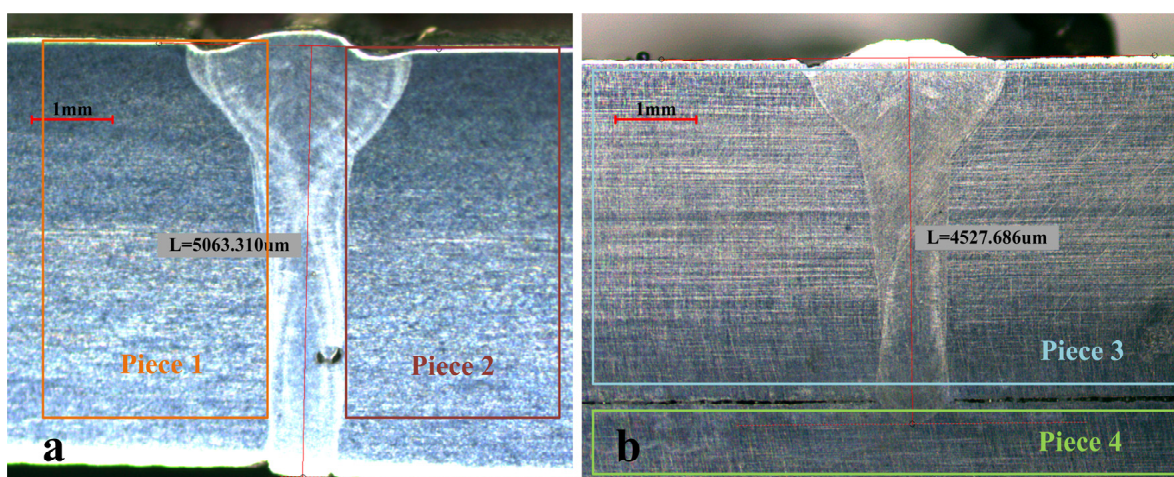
(a) Weld metallographic diagrams of the first type of 304 joints; and (b) weld metallographic diagrams of the first type of 304 joints.
